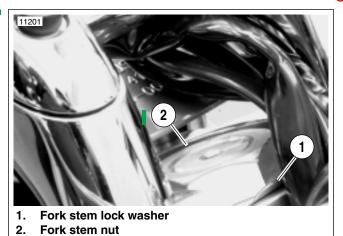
Fork Stem Lock Washer and Nut (front view)
